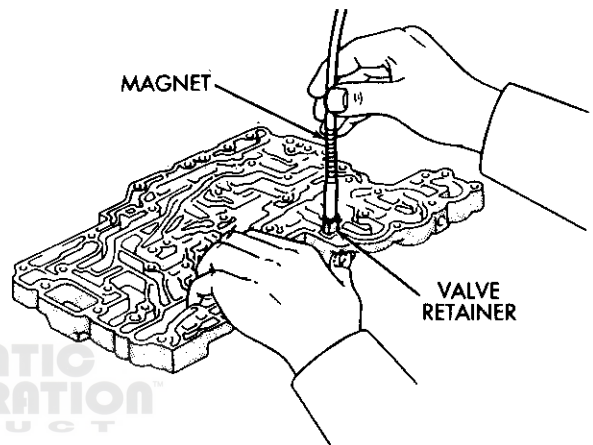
Removing/Installing Accumulator Control Valve Assembly
